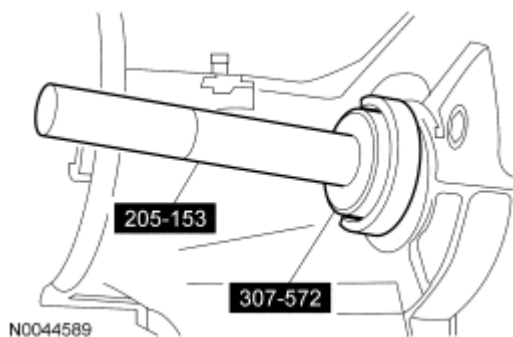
Identifying Special Tool (205-153, 307-572) And Halfshaft Seal
